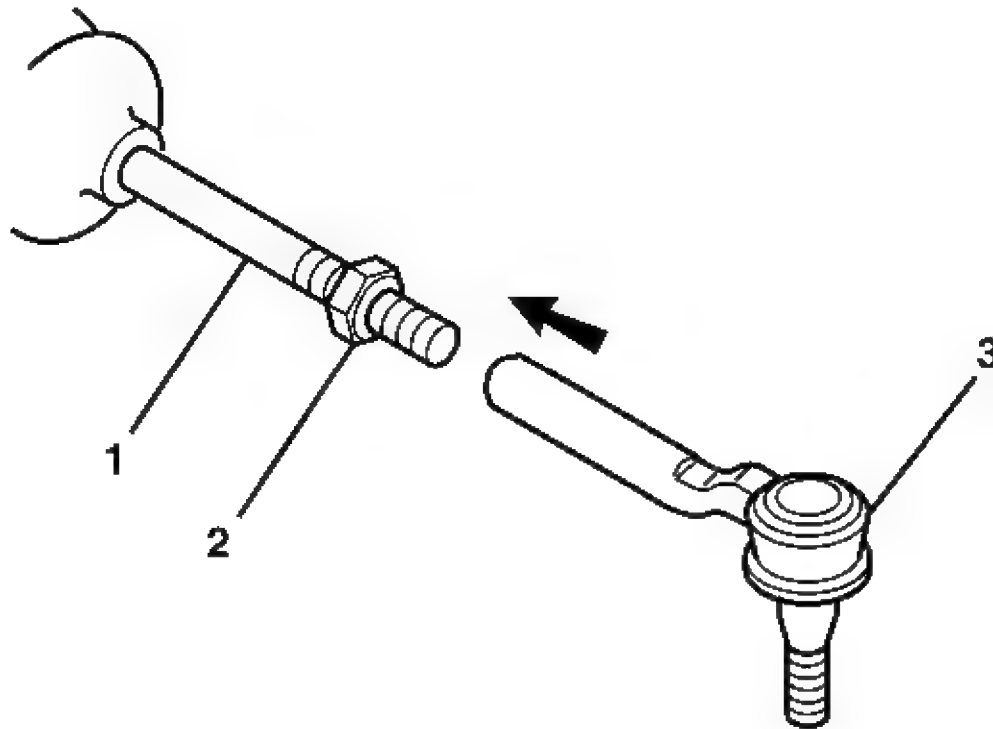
Connecting Outer Tie Rod Assembly To Inner Tie Rod
